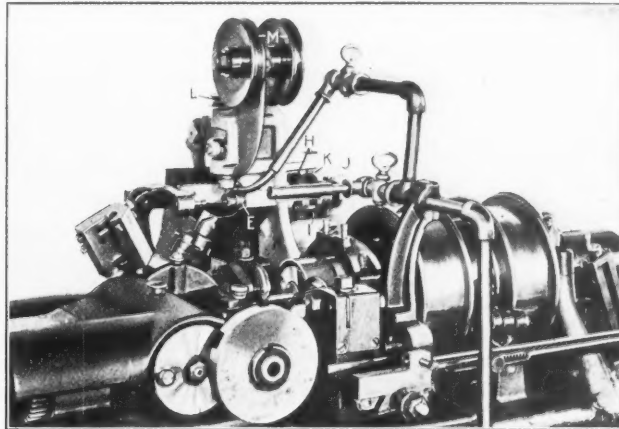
Rear View of the Index Drilling Attachment in Place on a No. 00 B. & S. Automatic Screw Machine
